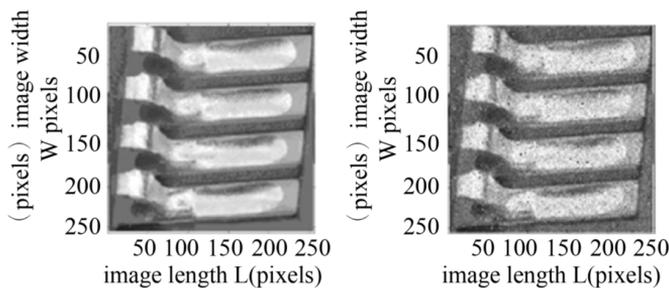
Uncertainty workpiece solder joint image and noise image: left part—raw image of SMT solder joint, right part—added mixed noise
